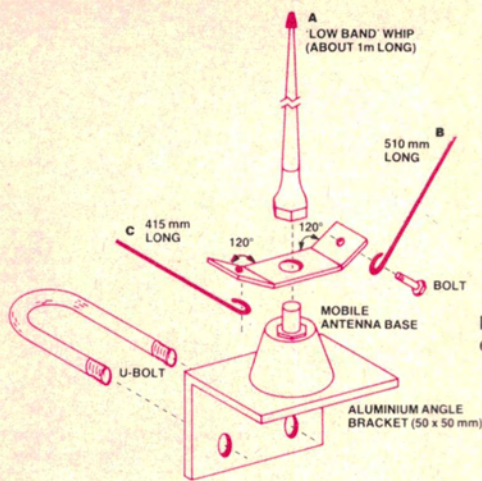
(a). Exploded view of the whip radiator assembly for the three-band groundplane.
